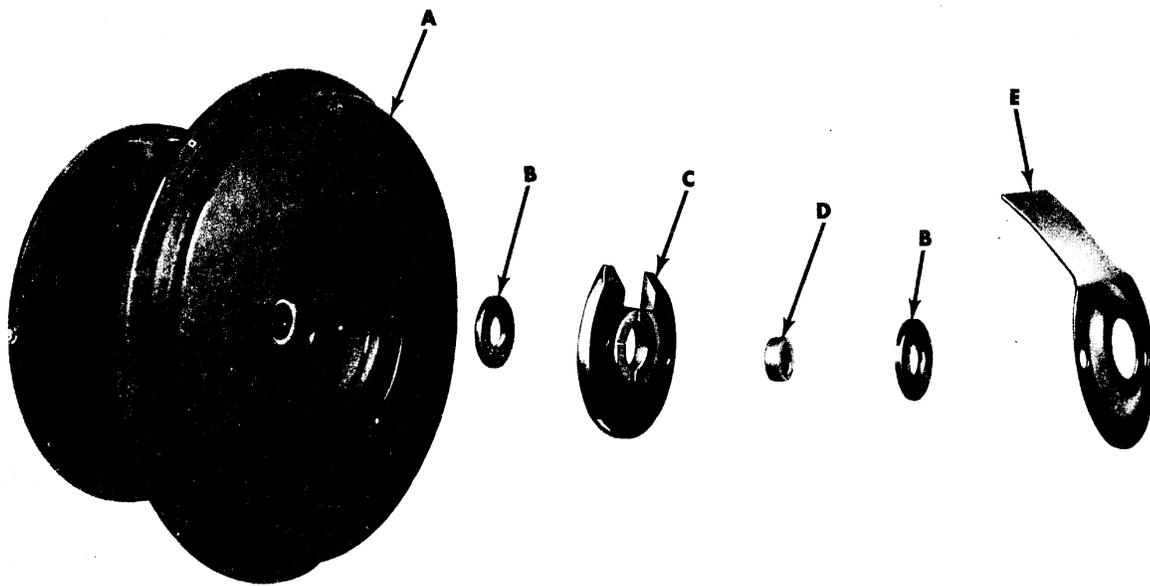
Removing oil deflector, thrust ring, spacer sleeve, thrust bearing, and thrust ring.
